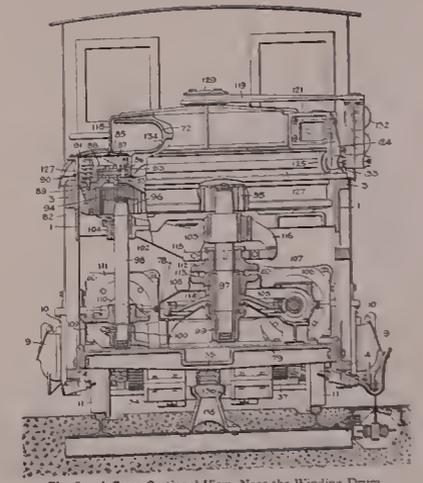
A Cross-Sectional View, Near the Winding Drum, of a Towing Locomotive
